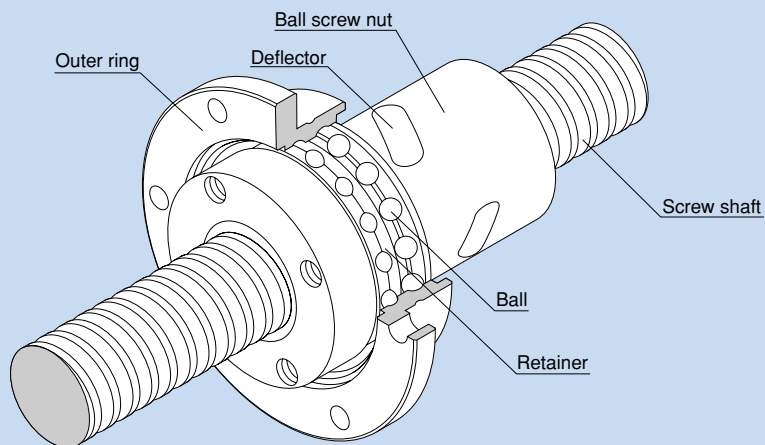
Structure of Standard-Lead Rotary-Nut Ball Screw Model DIR
